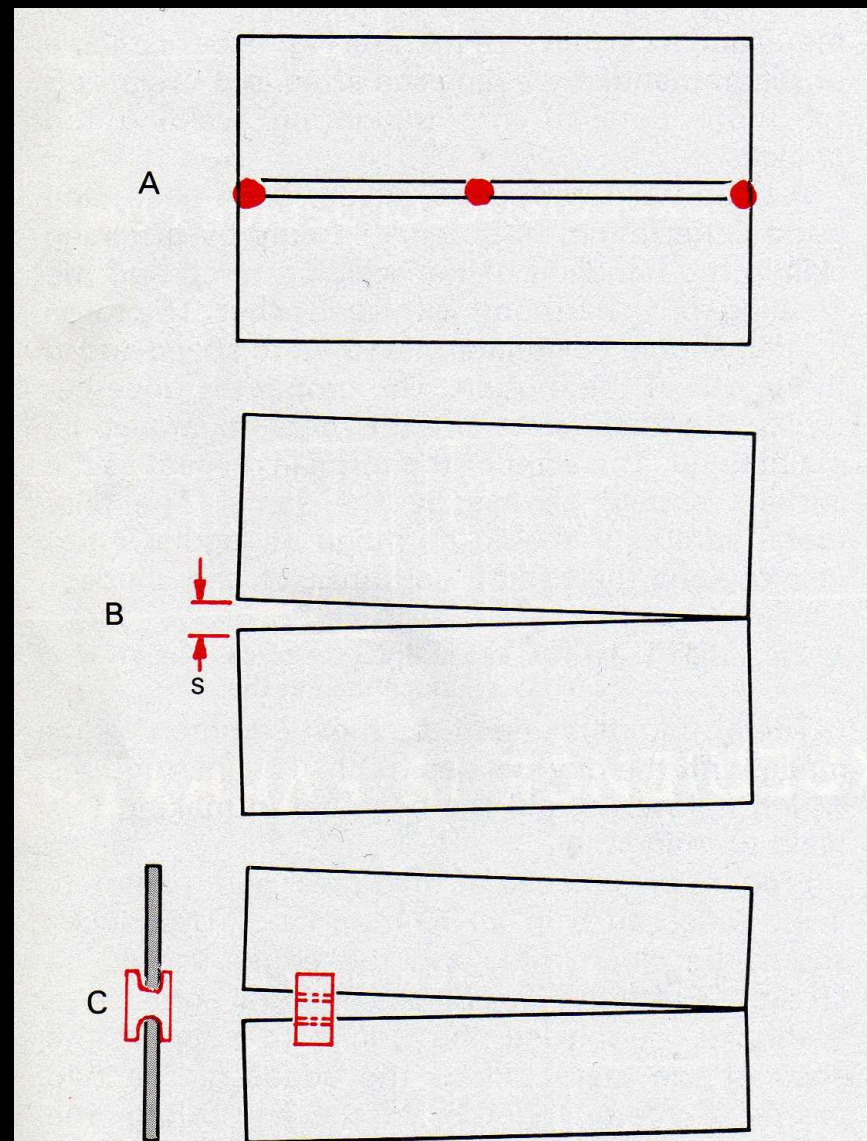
Some methods used to maintain correct position of welded pieces, since the weld metal shrinks as it solidifies and cools: A—"Tacking" pieces together before welding. B—Allowing for shrinkage (S). C—Use of special wedges.
